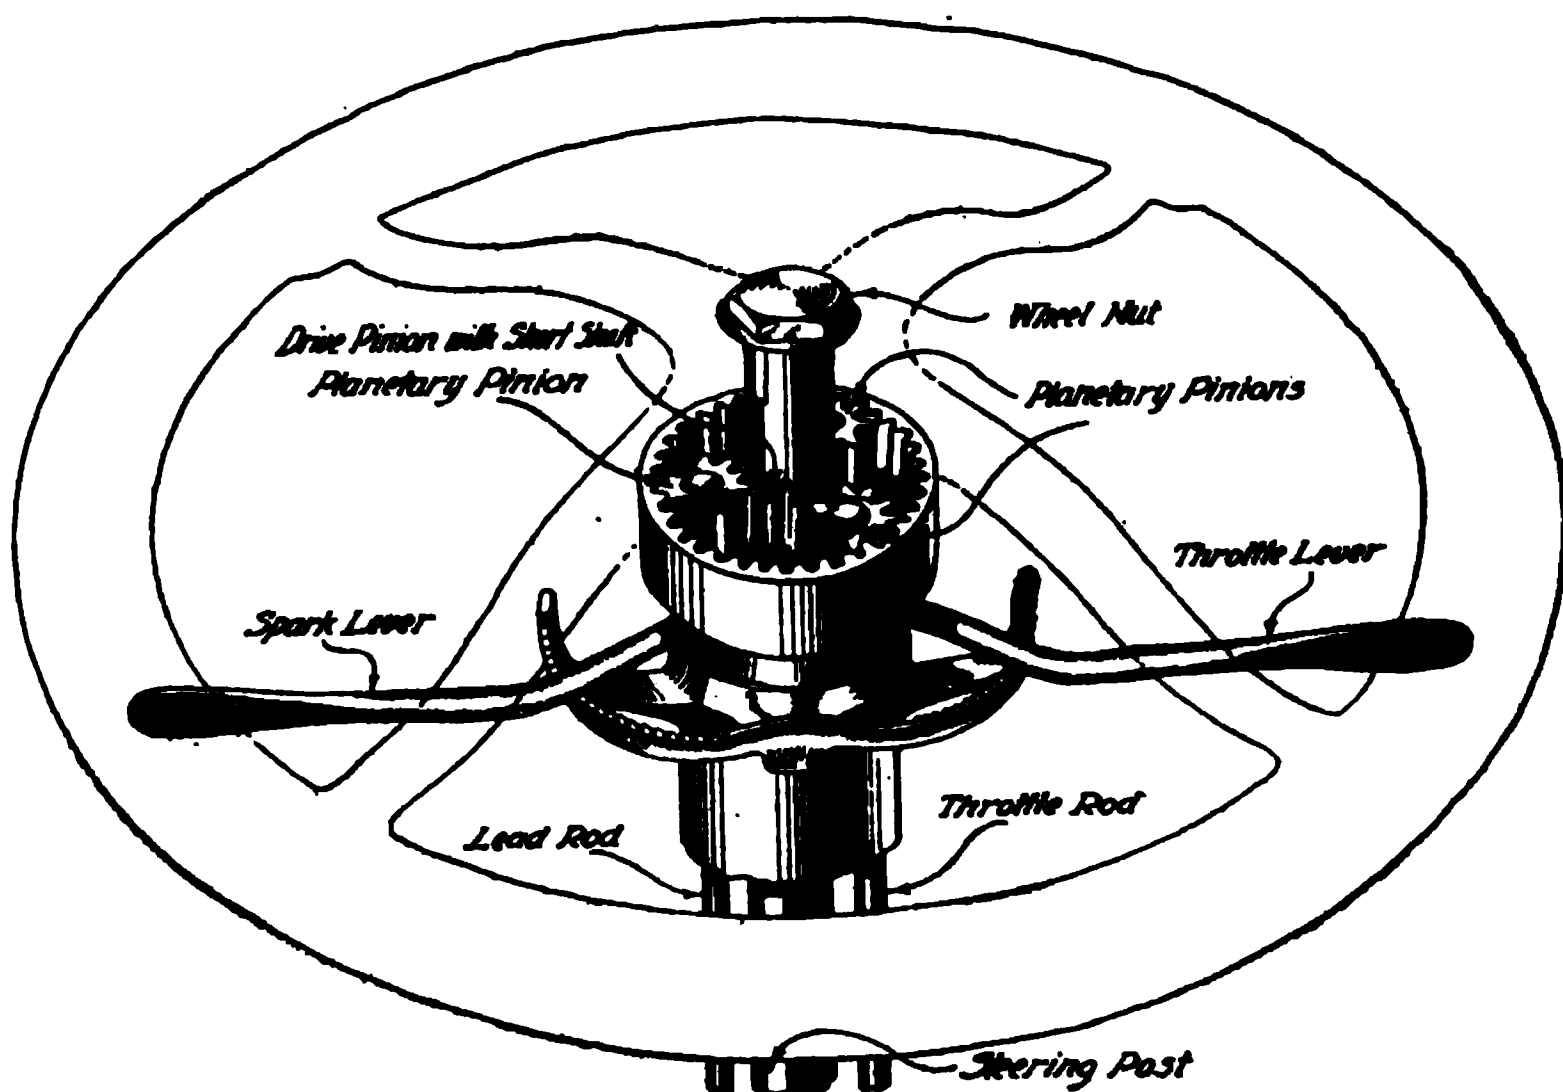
Ford Planetary Steering Gear—An Unconventional Type
